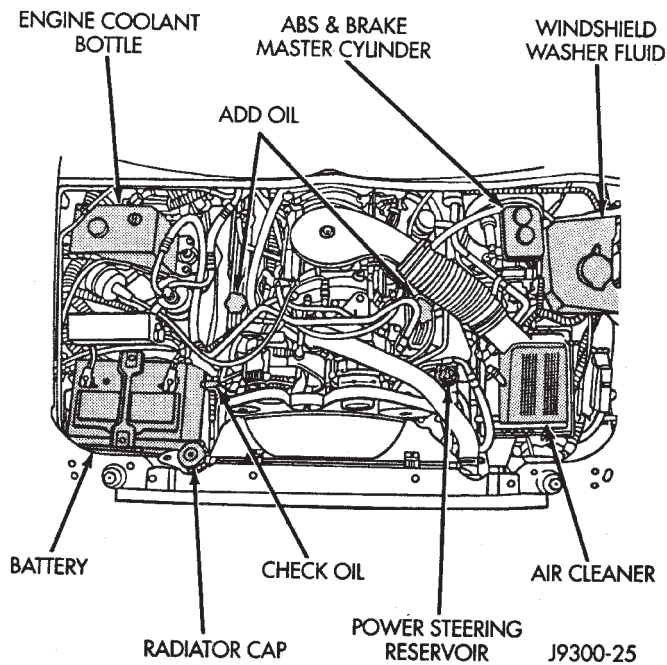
Engine Oil Dipstick Location 5.2L Engine—Typical
